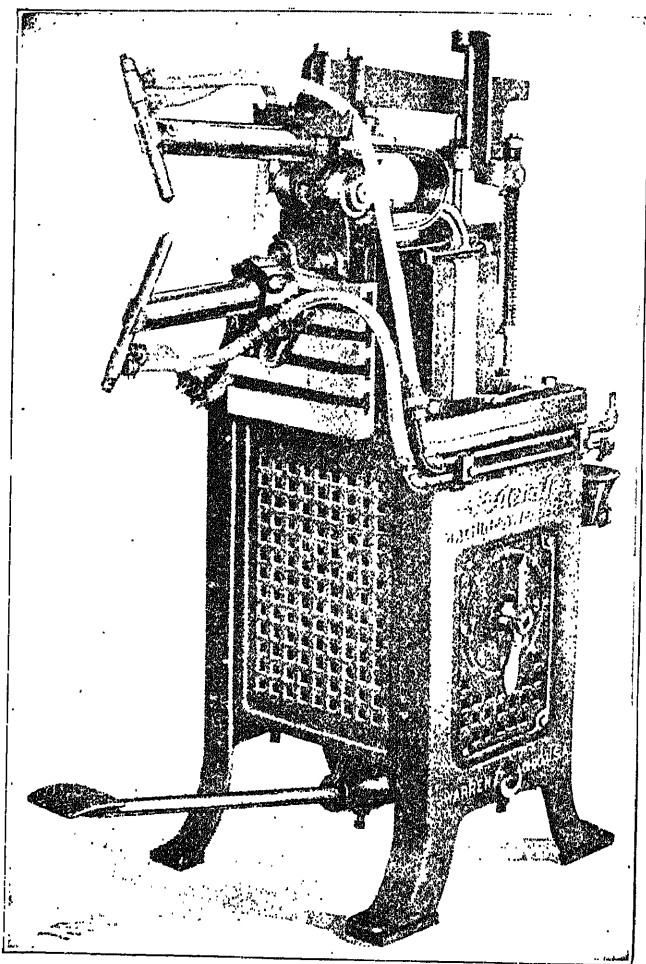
Federal Welding Machine with Universal Points.
